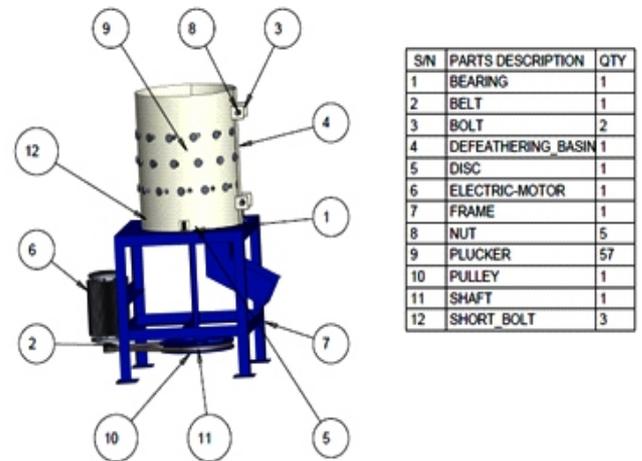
A conceptual drawing of the poultry de-feathering machine with an adjustable basin
